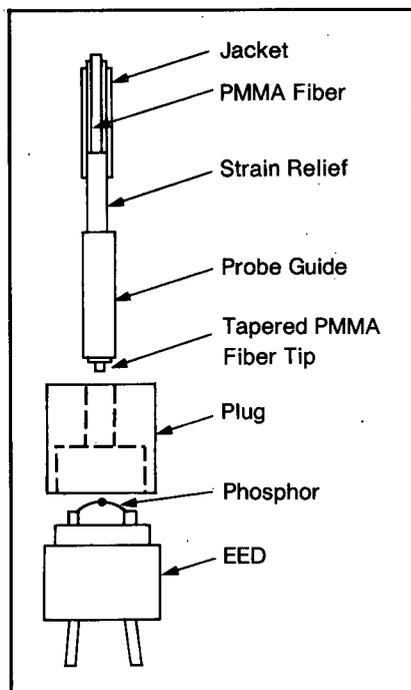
Cross Sectional View of Instrumented Mark 1 EED, Optical Fiber Assembly and Plastic Alignment Fixture. The Tapered Fiber is Used to Simplify Optical Coupling with the Small Sensor.
